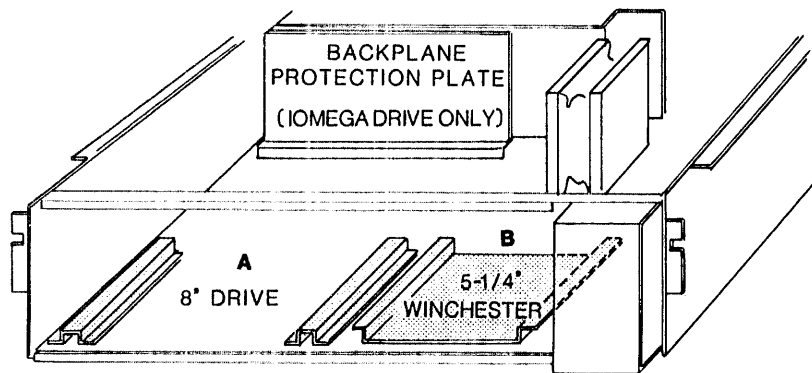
DRIVE MOUNTING LOCATIONS
